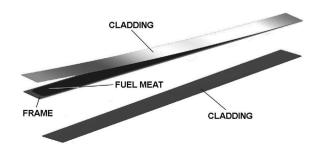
Schematic illustration of the finished fuel plate after rolling.
